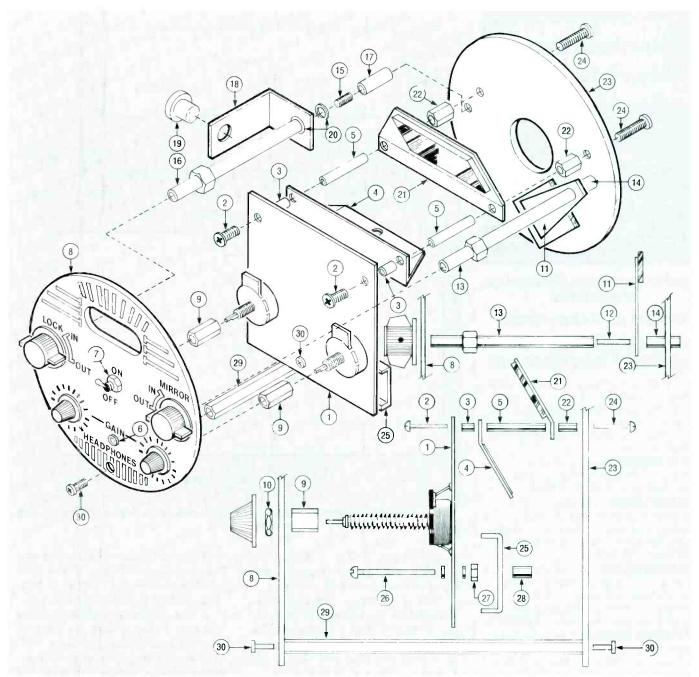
THE RECEIVER is a little more complicated than the transmitter. Identify all parts before assembling them.
